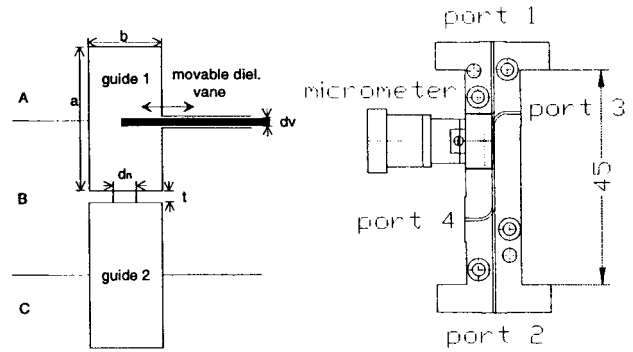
Construction of the coupler. A, B, and C designate the three mechanical parts which are machined separately.
